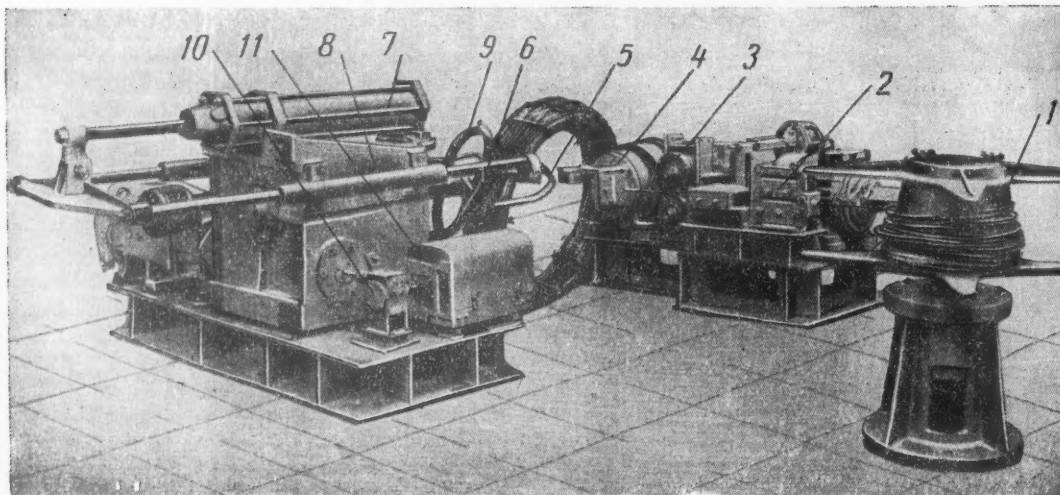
General view of machine for binding strip coils: 1) Wire holder; 2) guide; 3) feed rollers; 4) compressed-air shears; 5) threading stirrups; 6) rod of threading mechanism; 7) compressed-air cylinder; 8) differential reducing gear; 9) grips; 10) kinematic reducing gear; 11) control apparatus of binding machine.
